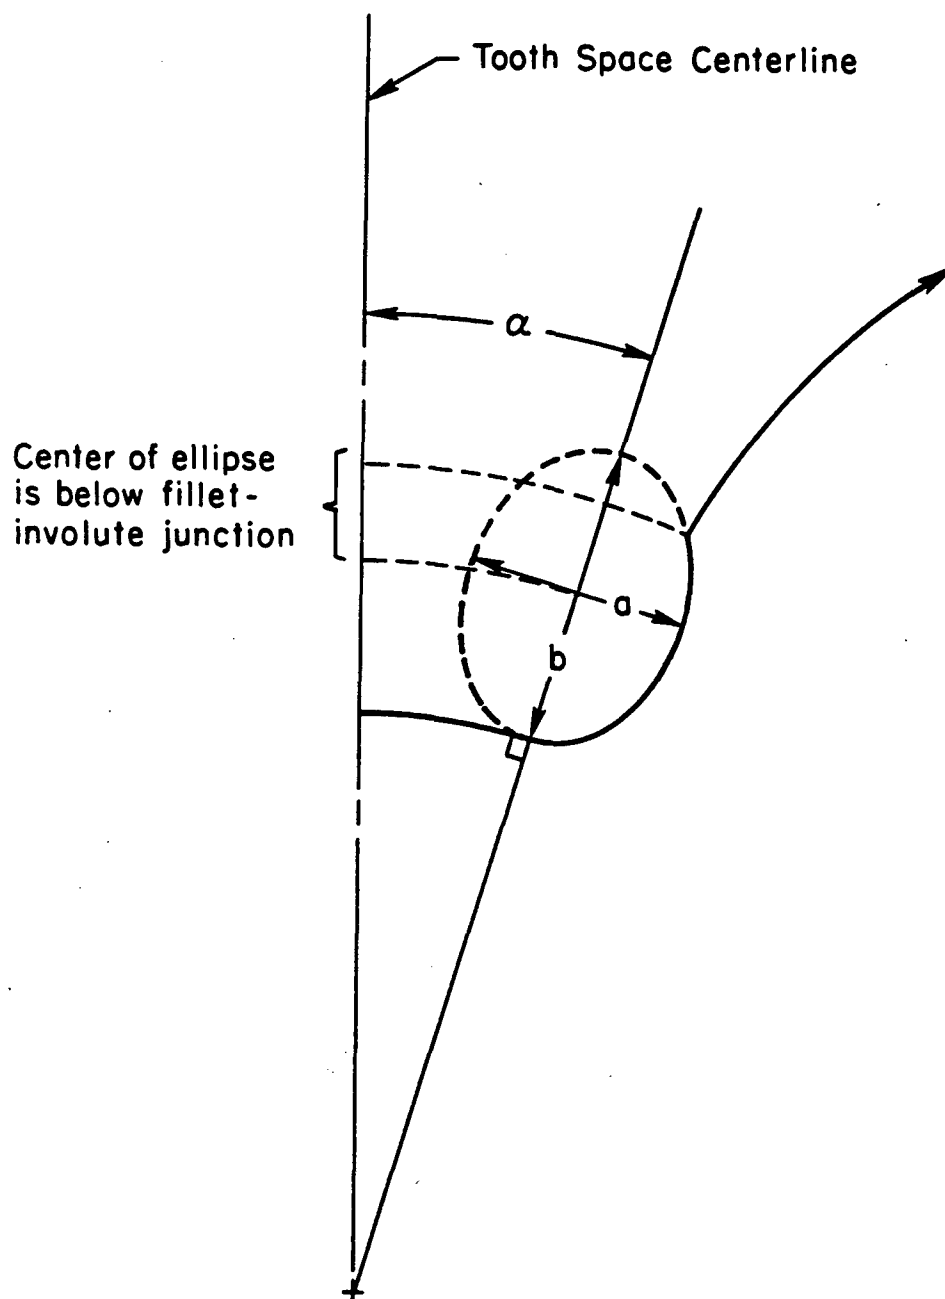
Altered Gear Tooth Fillet Geometry (a = transverse axis; b = radial axis; α = offset angle)
